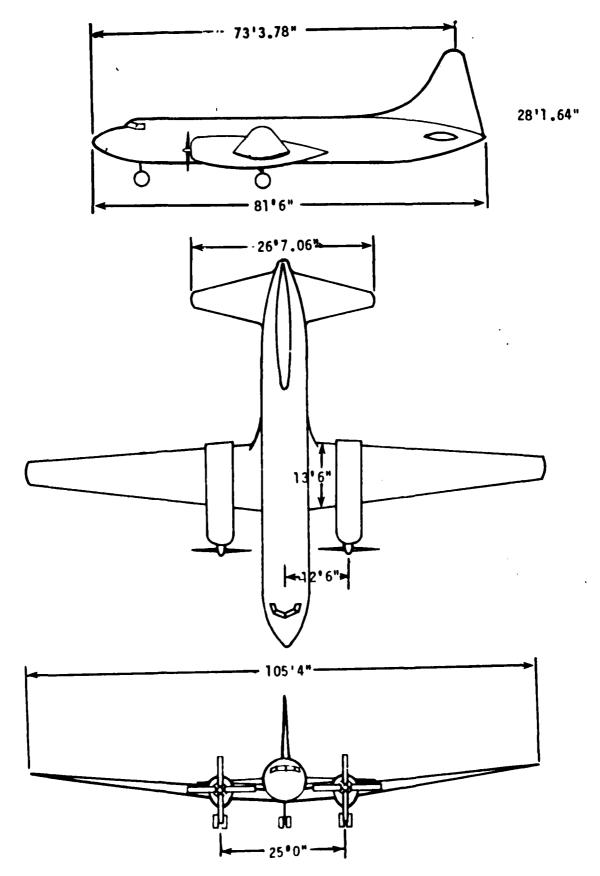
Three View Drawings of CV-580 Aircraft and Overall Dimensions
